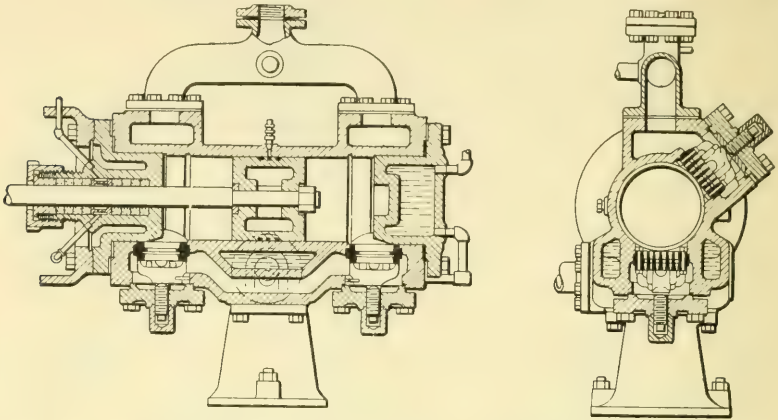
Horizontal Double-acting Ammonia Compressor with Plate Valves.
